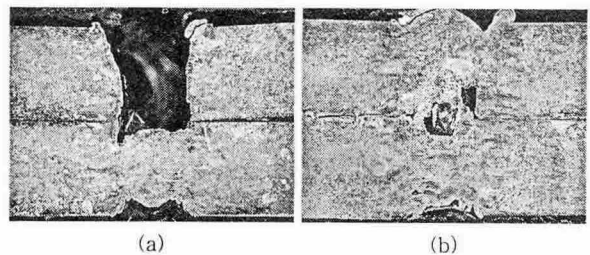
Transverse cross-section of autogenous laser lap joining of zinc-coated steel sheets ; (a) Blow-hole, (b) Porosity
